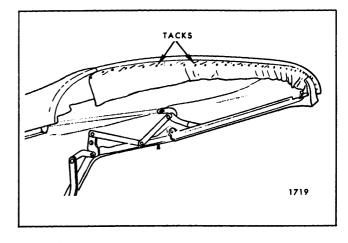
Installation Of Top Material To Front Roof Rail
